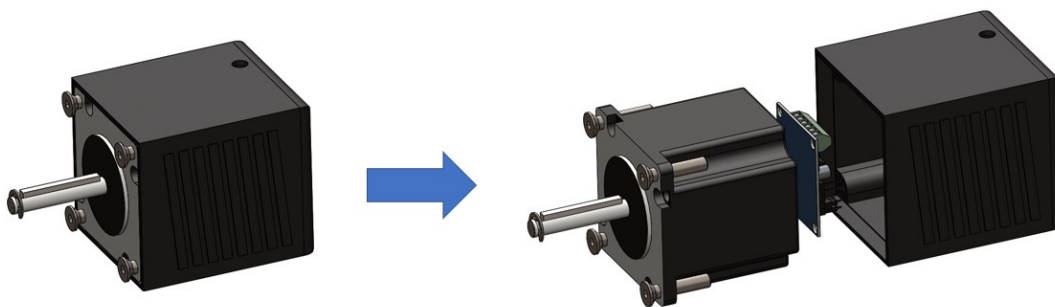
Stepper motor in the 3D printed protective cover, with integrated shield drive.
